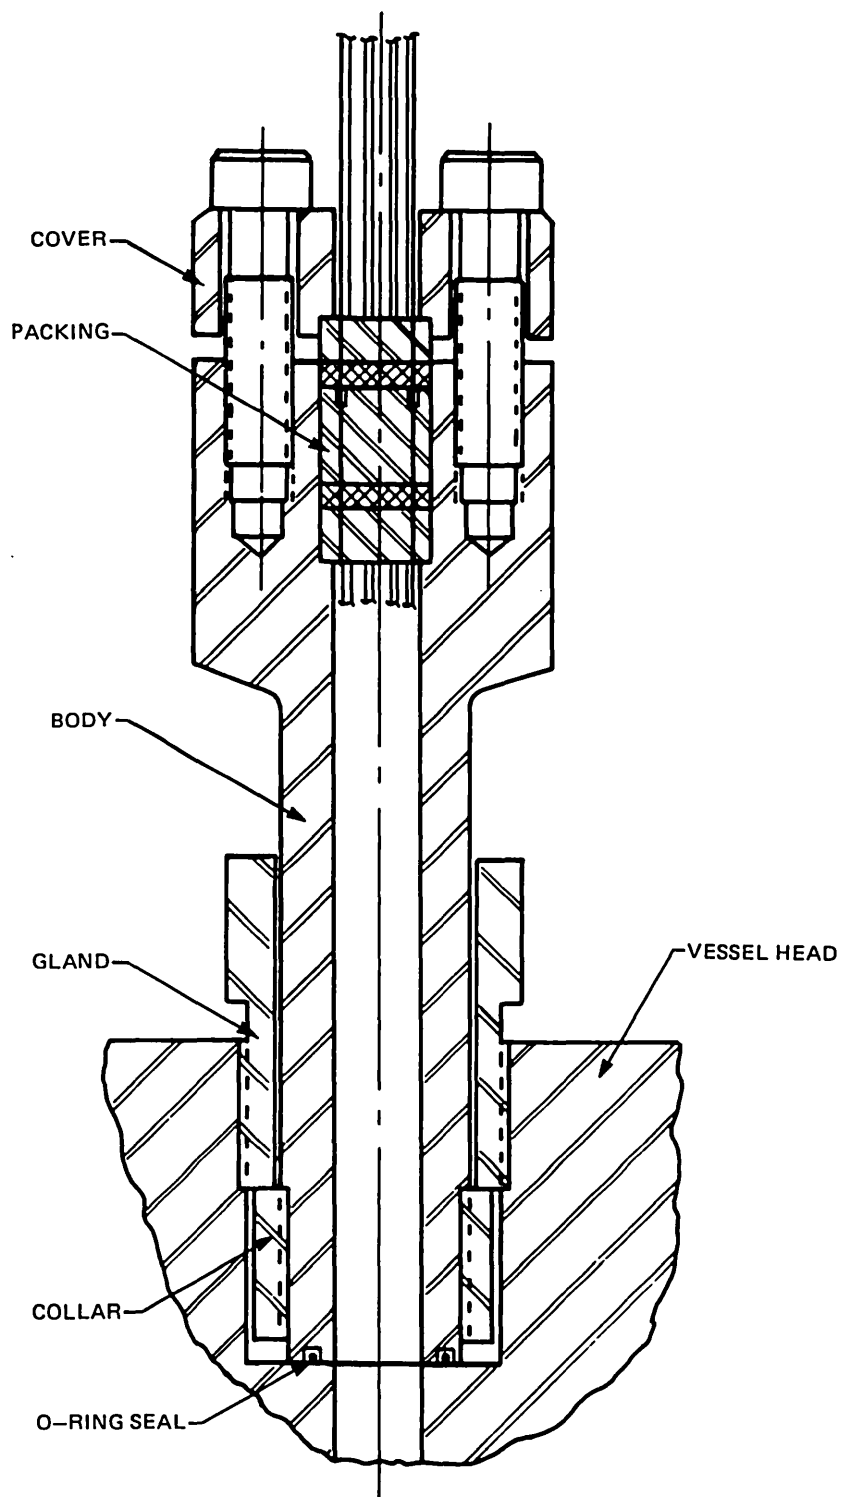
Cross section of unmodified instrument lead penetration assembly.
